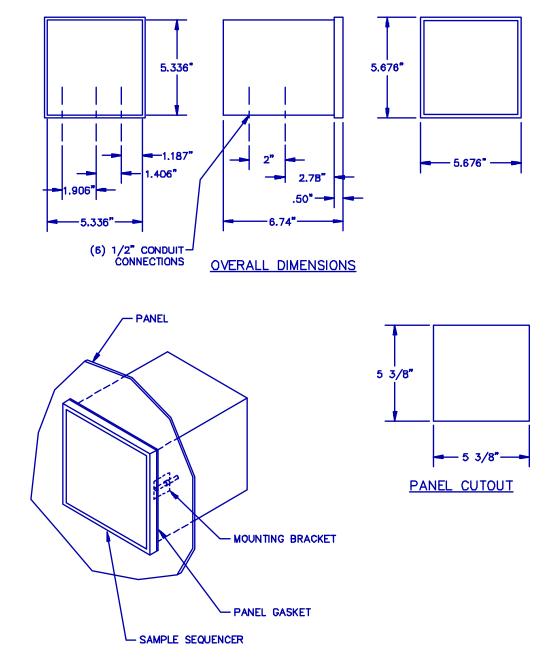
Panel Mounting & Overall Dimensions Sample Sequencer
